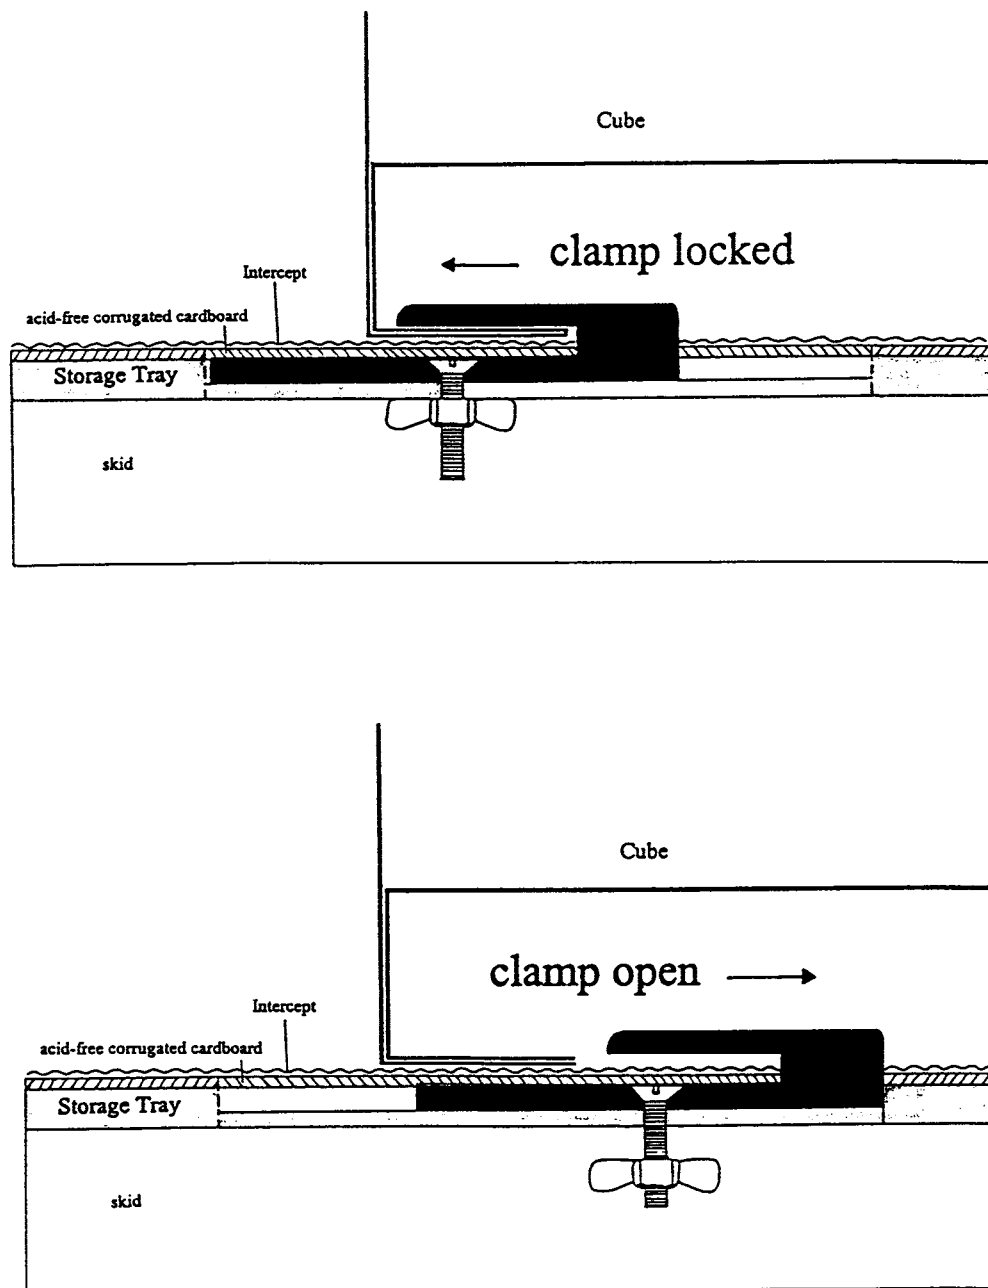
Detailed cross section of clamp mechanism on storage tray.
